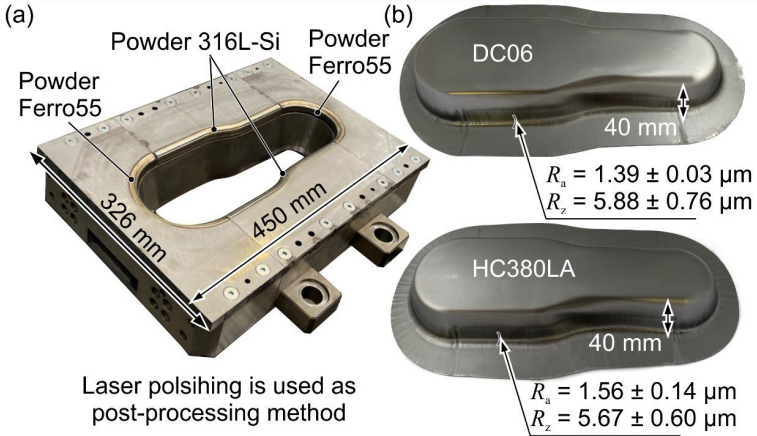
(a) Manufactured hybrid laminated demonstrator die, (b) deep-drawn parts from DC06 and HC380LA with a thickness of 1 mm
